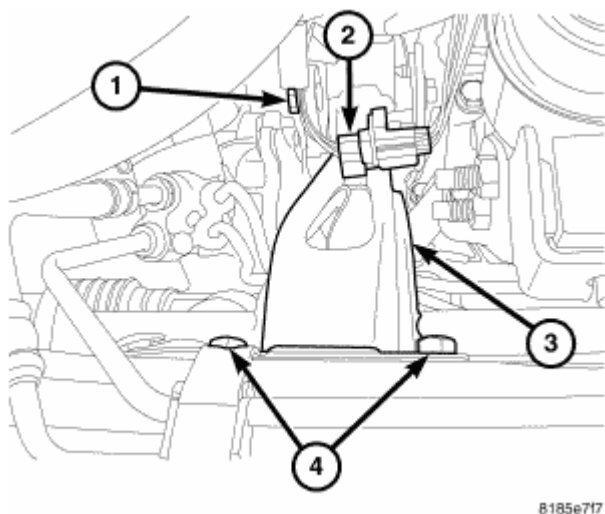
FRONT MOUNT THROUGH BOLT
